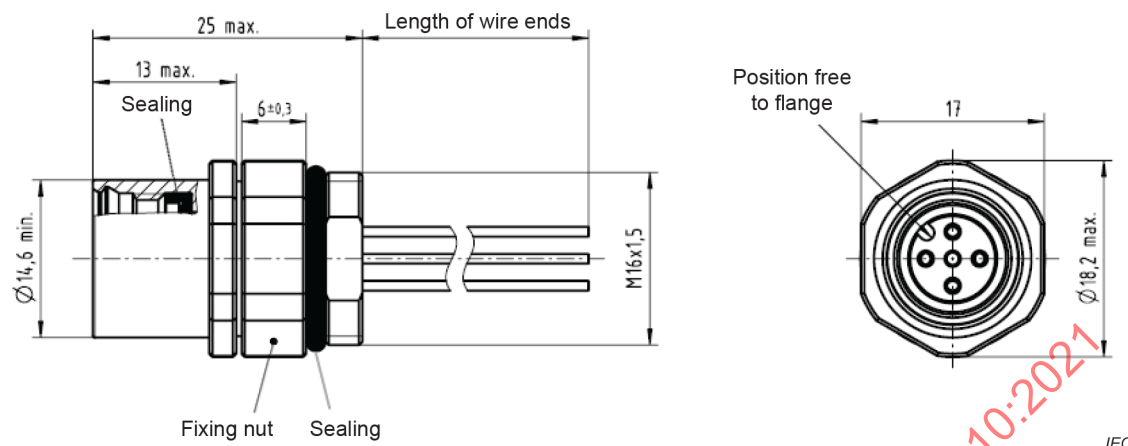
Fixed connector, female contacts, with M12 screw locking and inner push-pull locking, with wire ends, single hole front mounting thread M16 × 1,5 and mounting orientation
